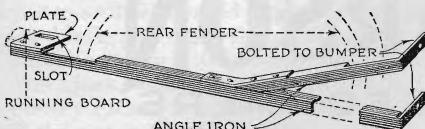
A rear fender guard like this prevents motorists from hooking your bumpers. It can be removed easily and quickly for changing tires
